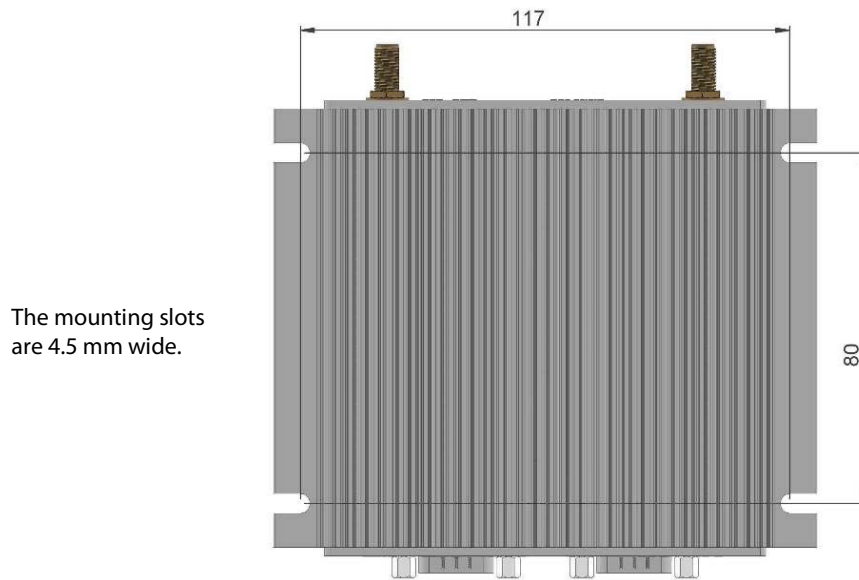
MBox-R-E39, Mounting Dimensions (mm), Top View
